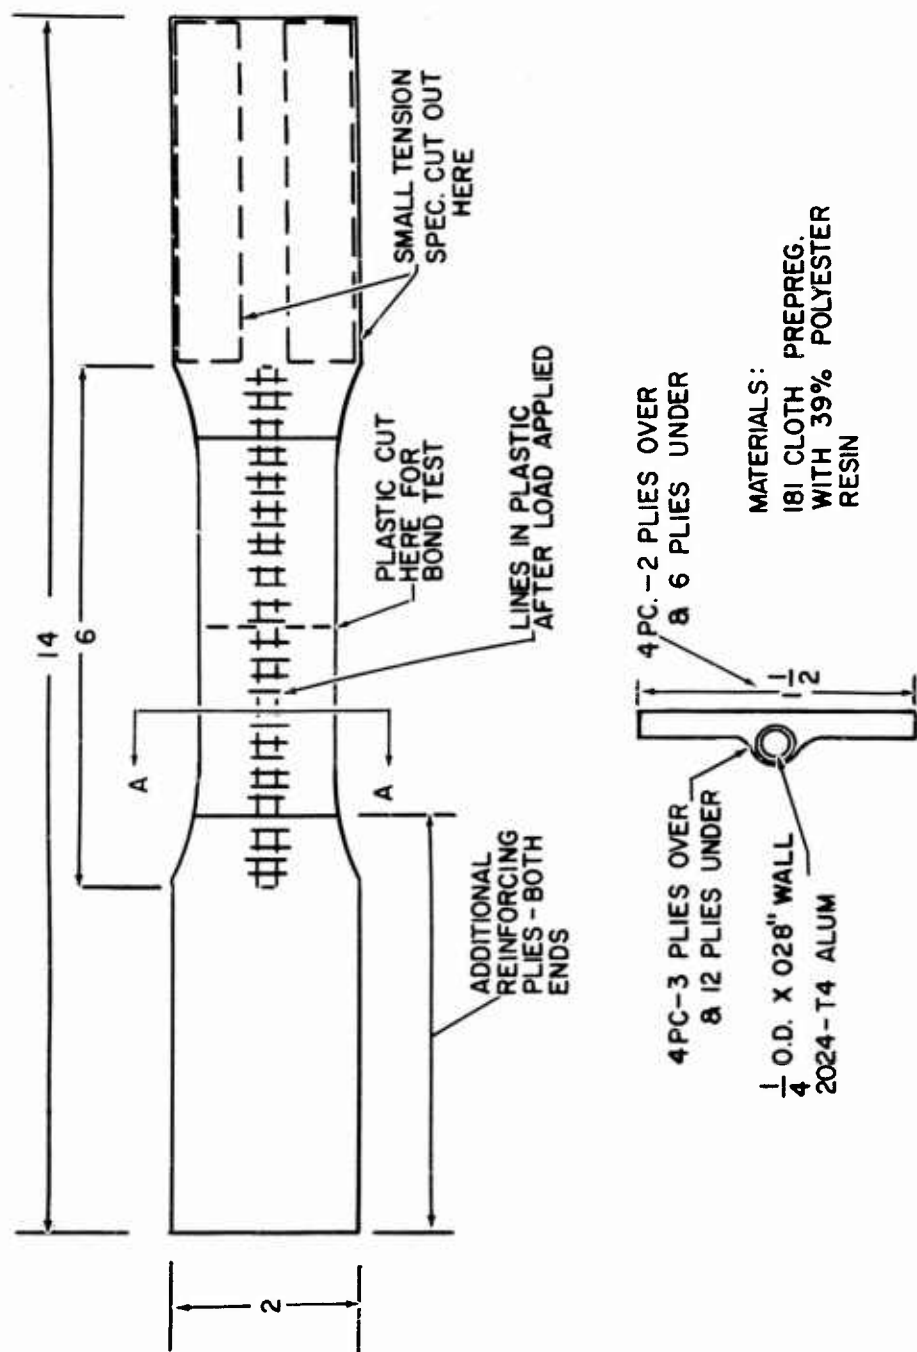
TUBE IMBEDMENT TEST SPECIMEN
